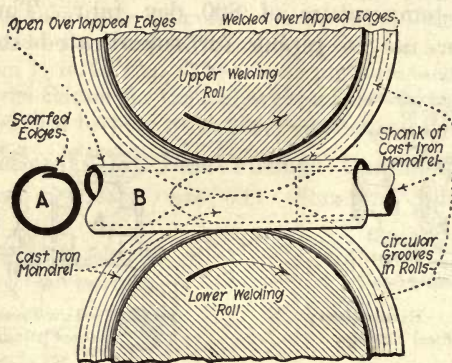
Method Of Forming Lap-Welded Pipe.
